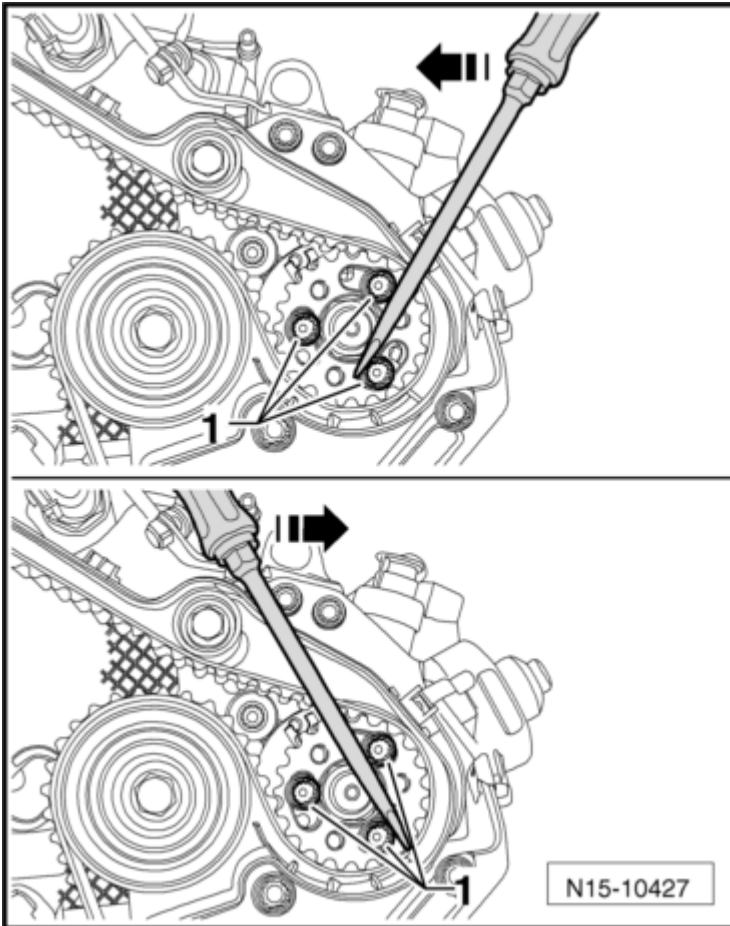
Identifying Screwdriver Secured At Bolt Heads -1-
